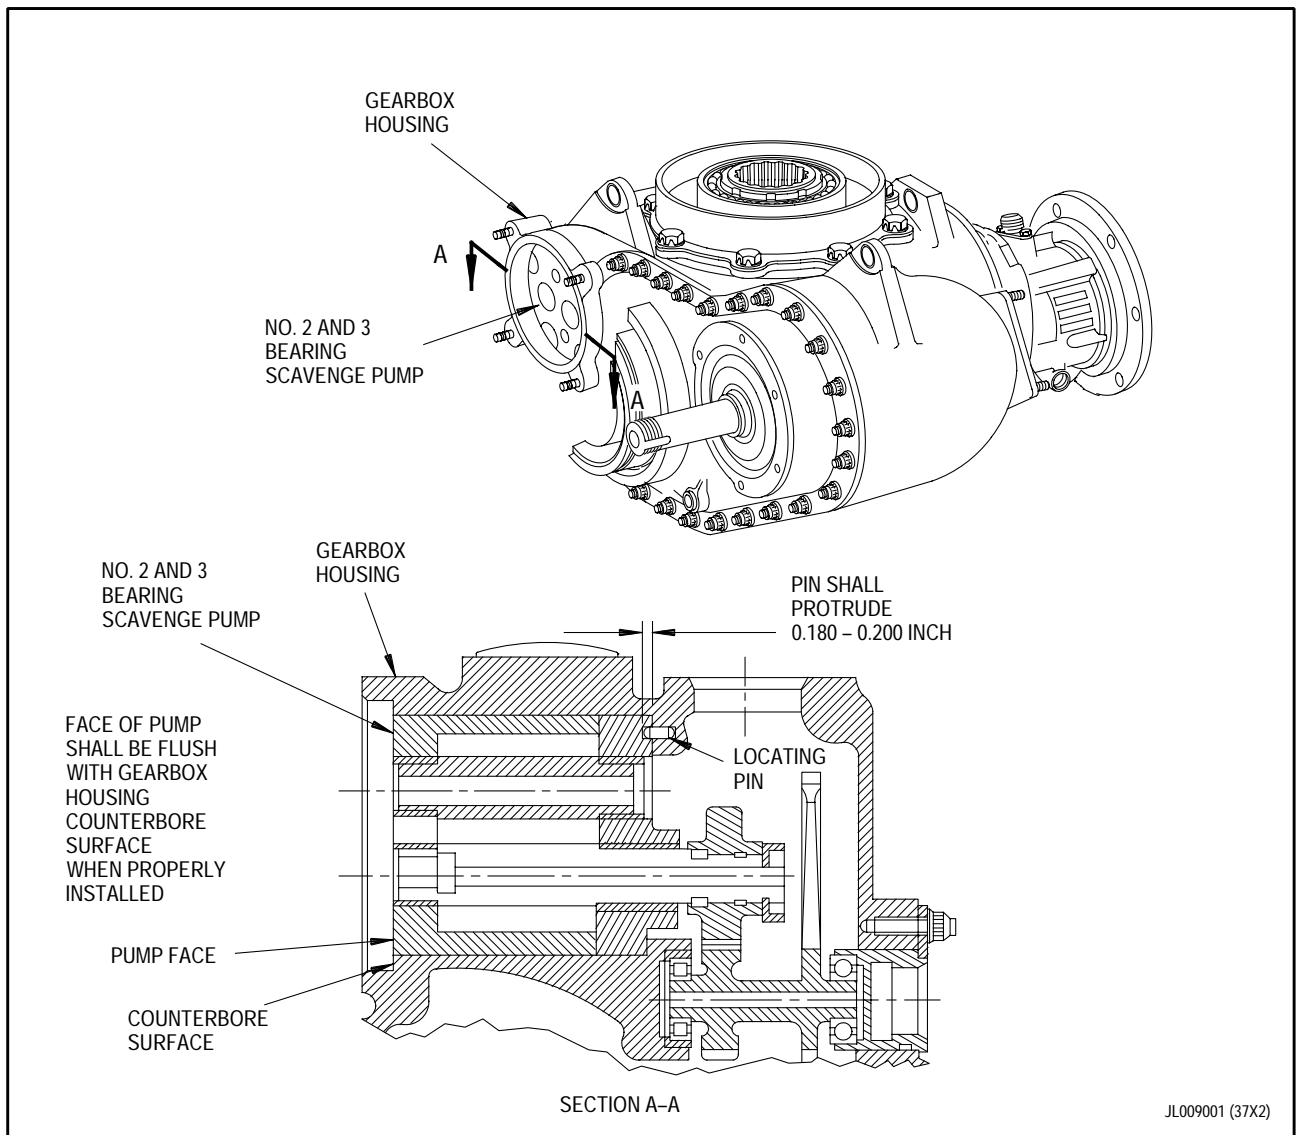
No. 2 and 3 Bearing (Gearbox) Scavenge Pump - Installation
